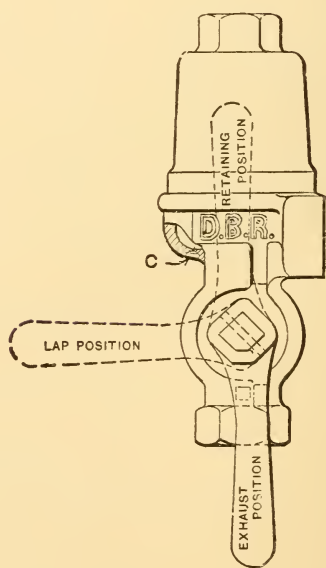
DRIVER-BRAKE RETAINING VALVE.
